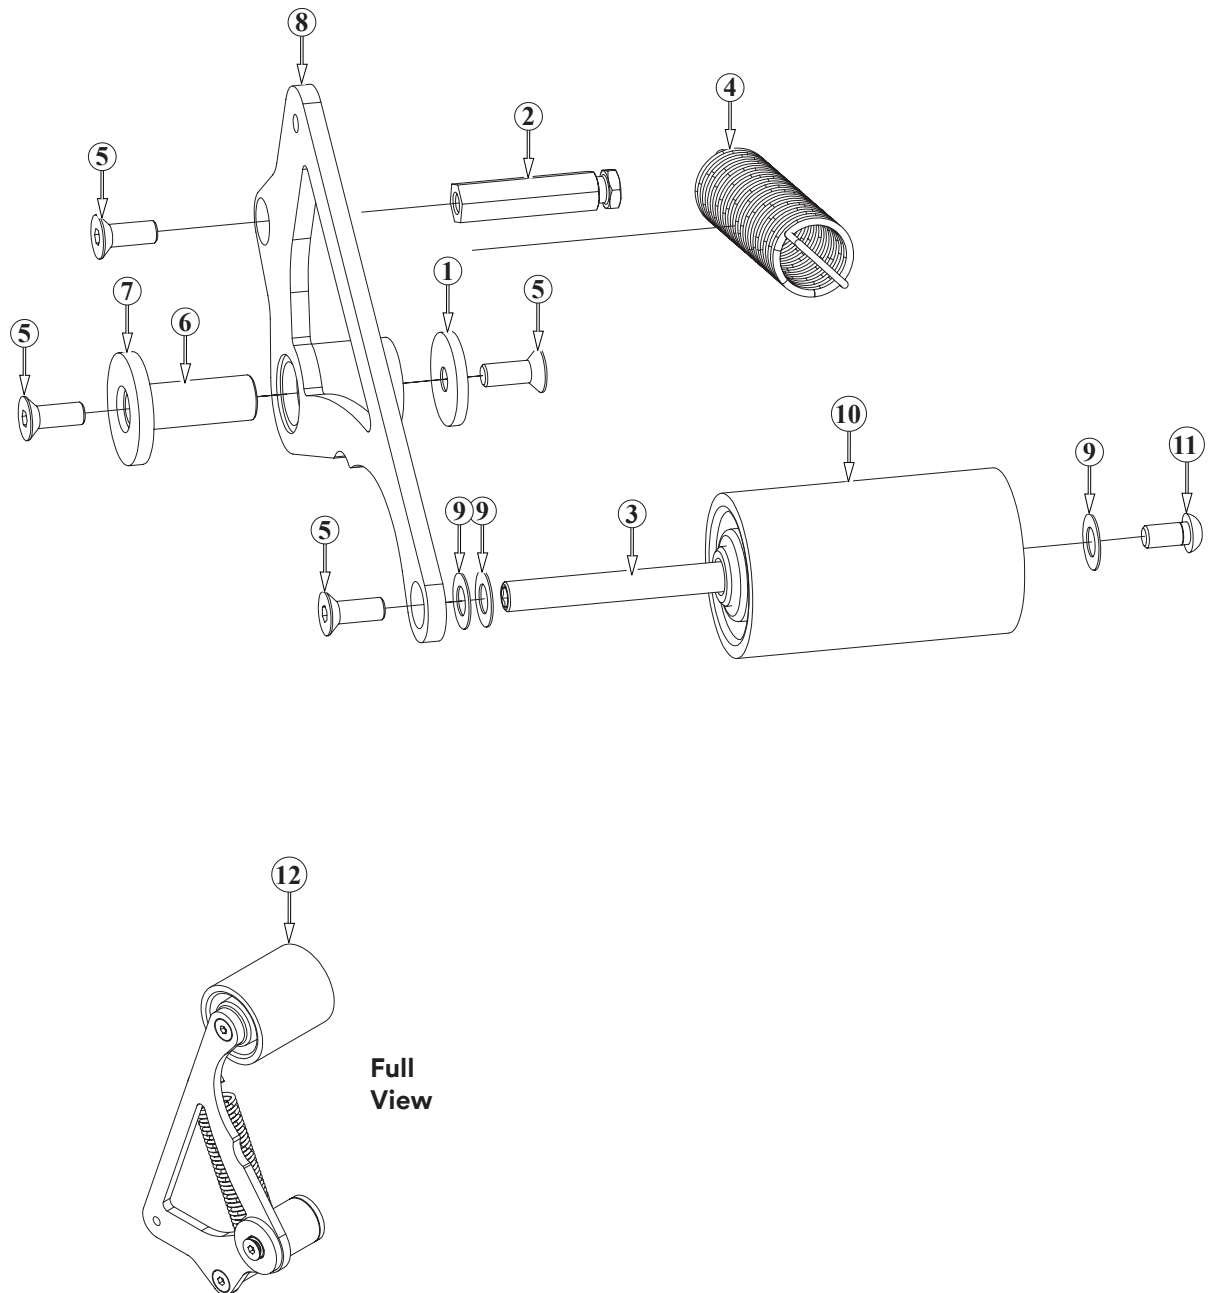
Lower Taping Head / Buffing Arm Assembly
